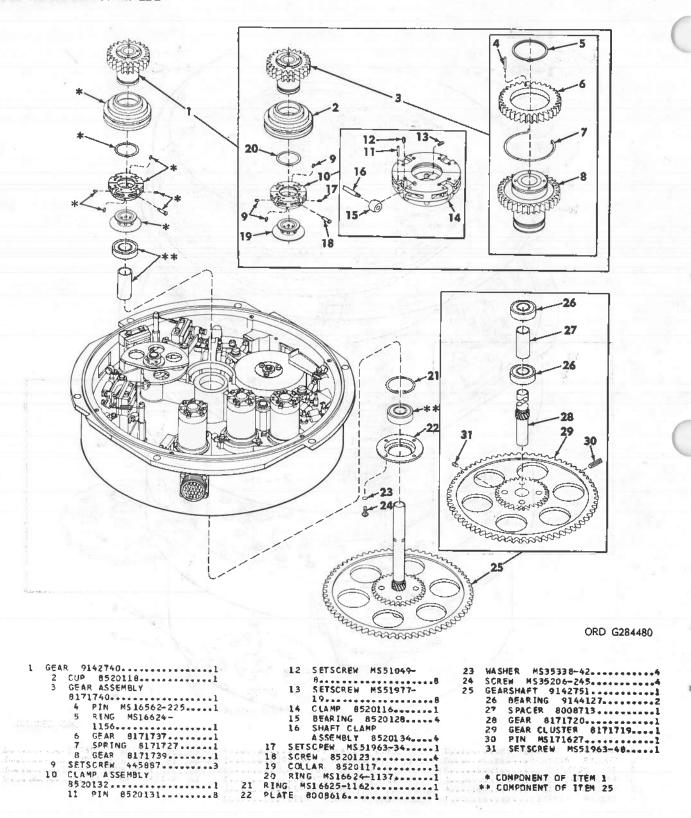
TRANSMITTER, POSITION. GUIDED MISSILE /9007947/-PARTIAL EXPLODED VIEW
